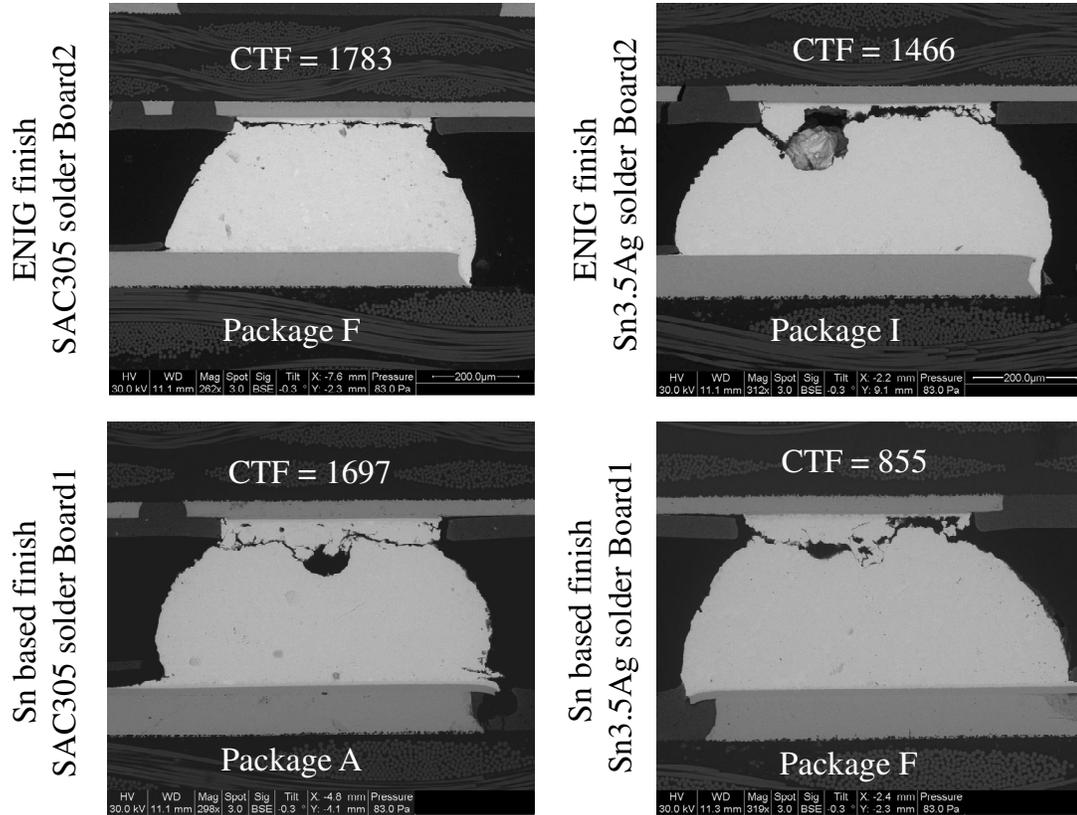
Failure locations in various 256 I/O BGA package types (courtesy: CALCE)
